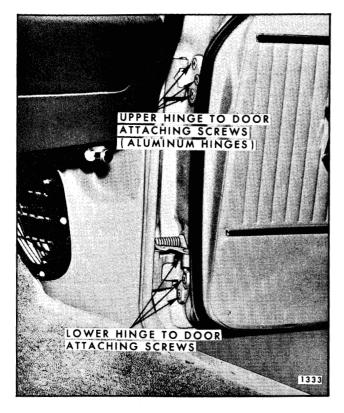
Front Door Hinge Attachment - "A" Styles
